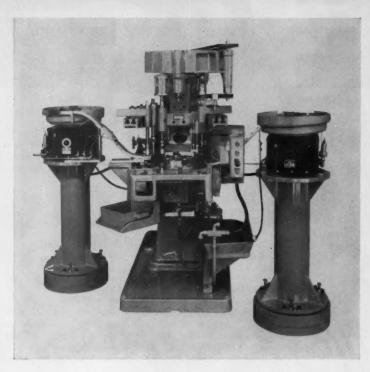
Bodine dial type automatic multiple-spindle machine performing several operations on battery filler caps, including assembly of two cap components
